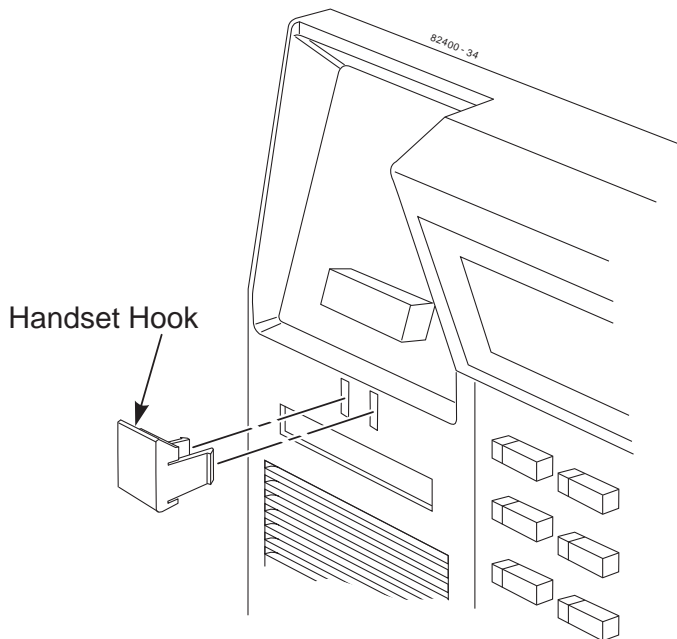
INSTALLING THE WALL-MOUNT HANGER
